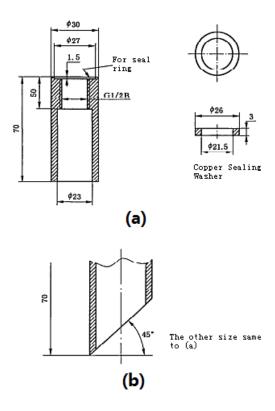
Mechanical drawing of welding base for (a) vertical installation and (b) inclined installation
